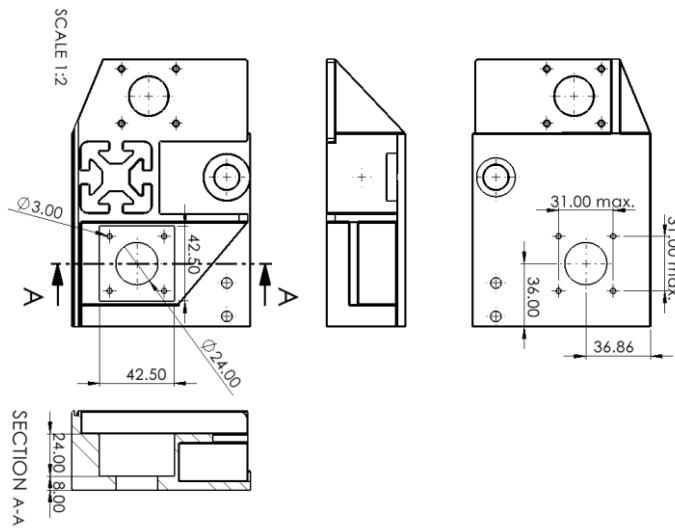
Modified design of motor plate for using NEMA 17 stepper motor to control test arm.
